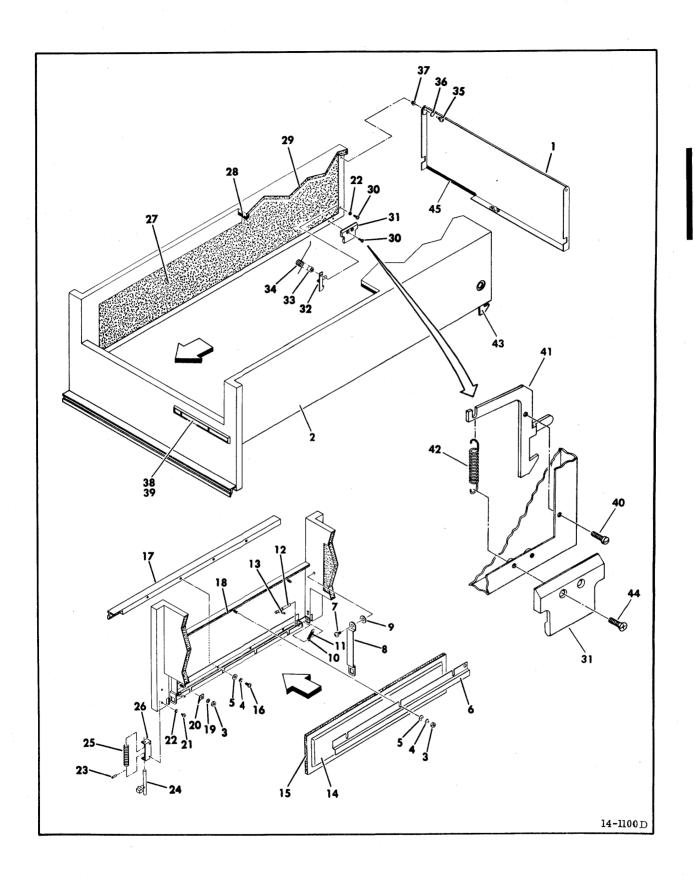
Case Assembly - 36 Inch Rack Mount
